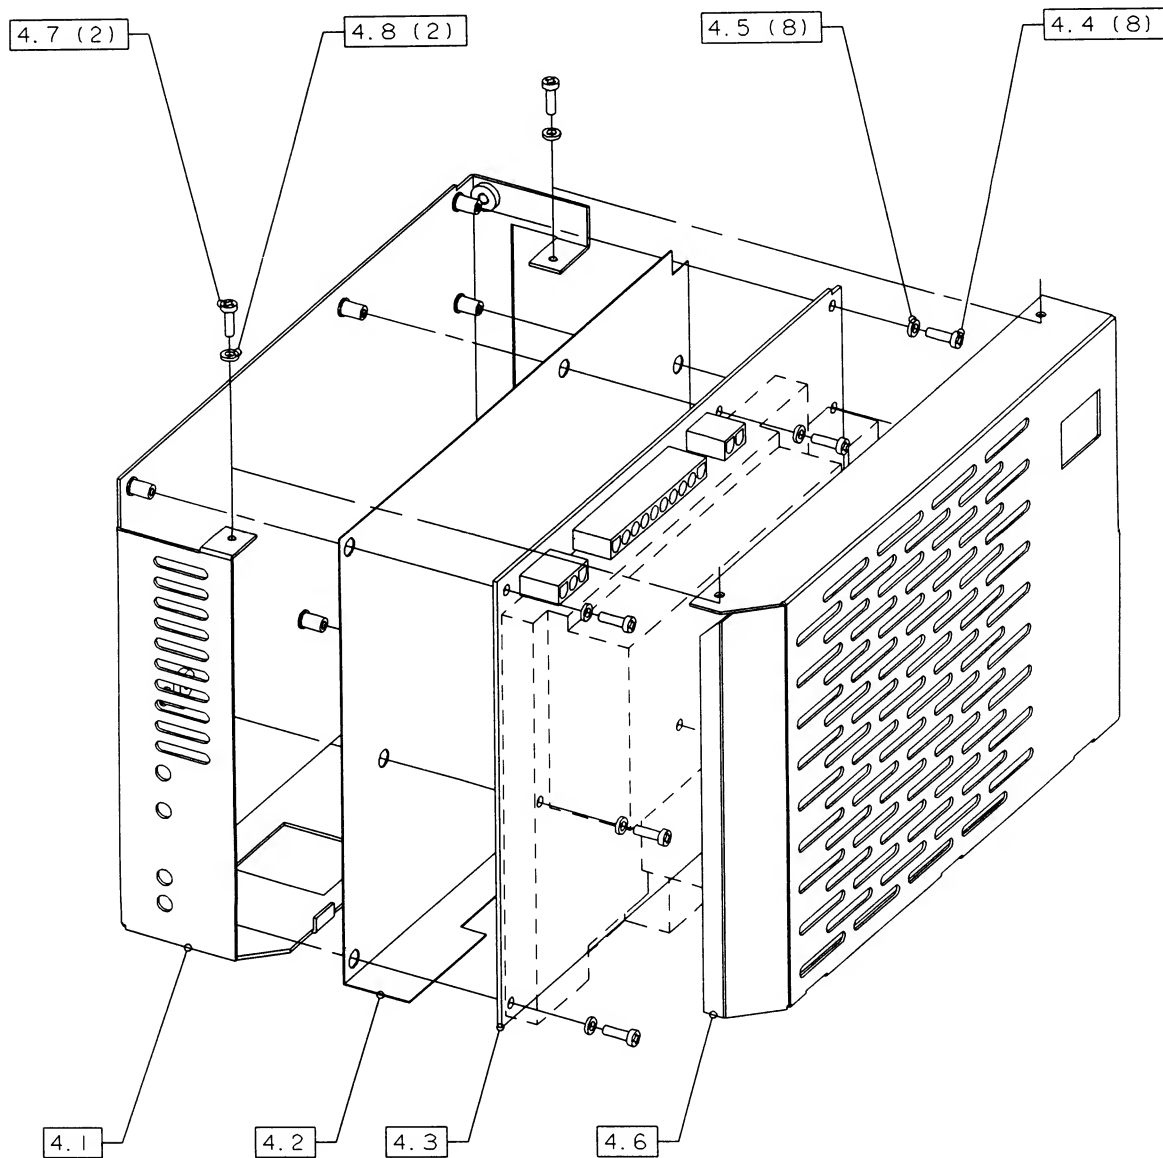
93XX-PS1715 POWER SUPPLY EXPLODED VIEW
